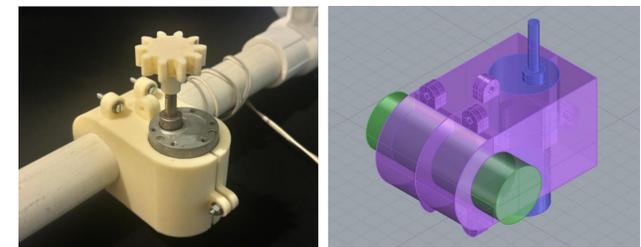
Images and Drawings of the Motor Holder and the attachment used to connect it to the valve shown.
